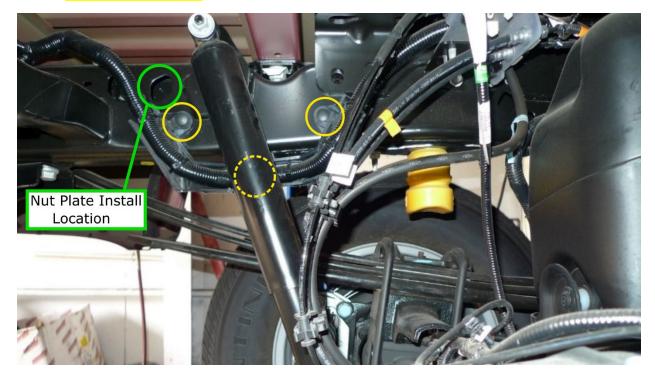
Plastic Push Pin Locations, & Driver Side Nut Plate Install Location
